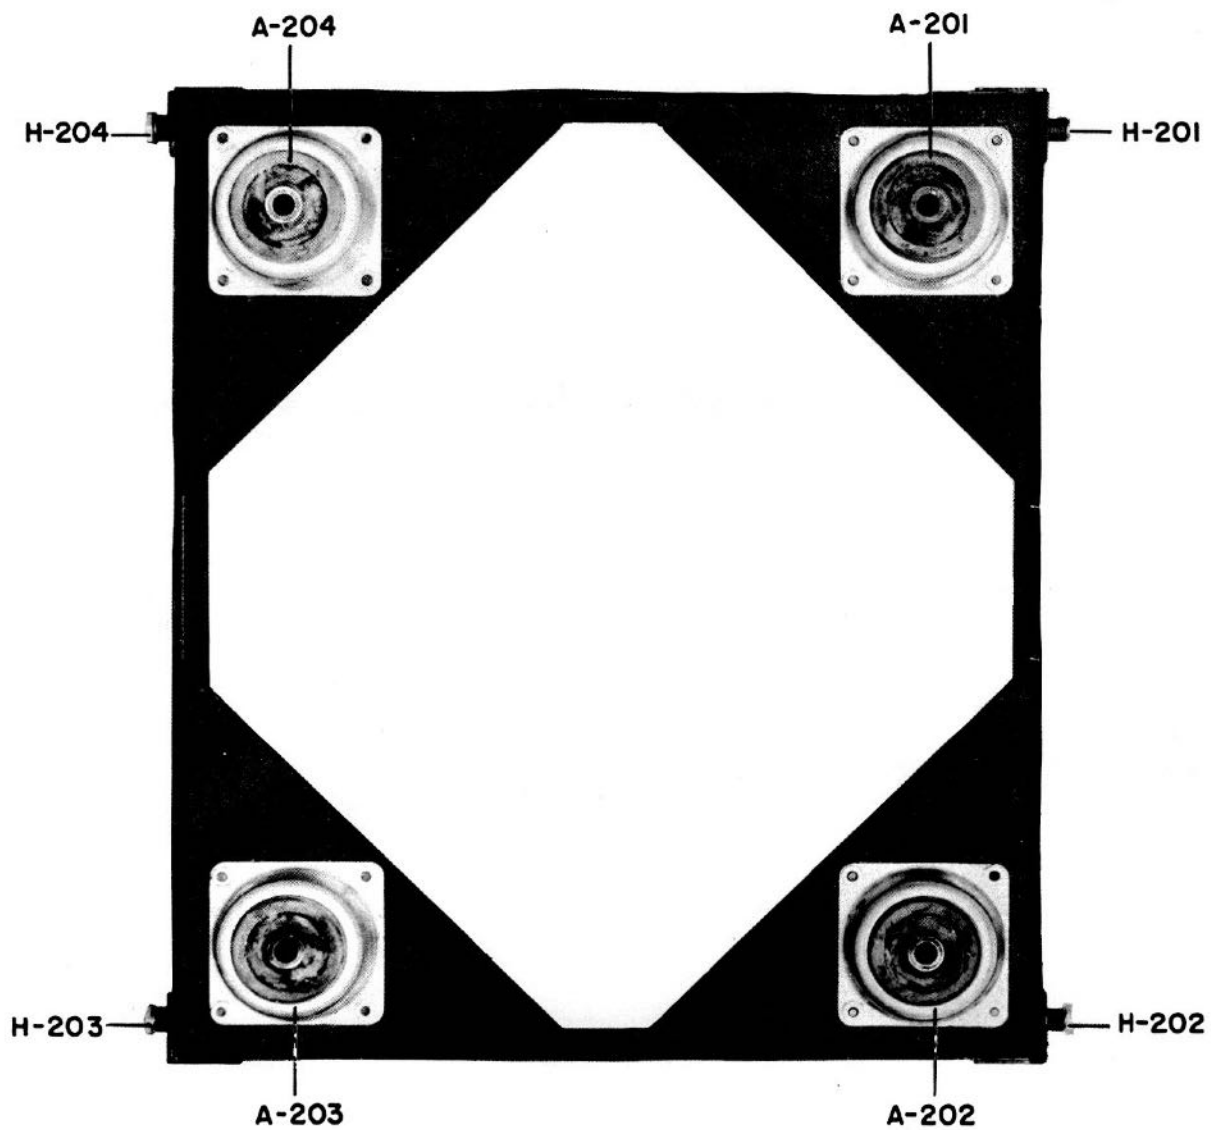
Bottom View of Type CNA-10124 Mounting Base
